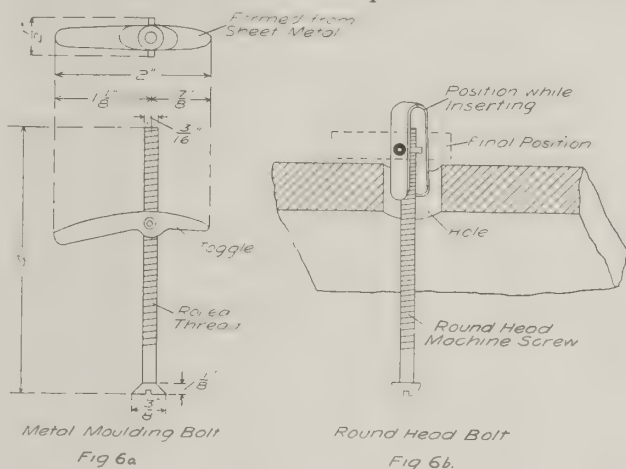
a AND b. SCREW TYPES OF TOGGLE BOLTS.
